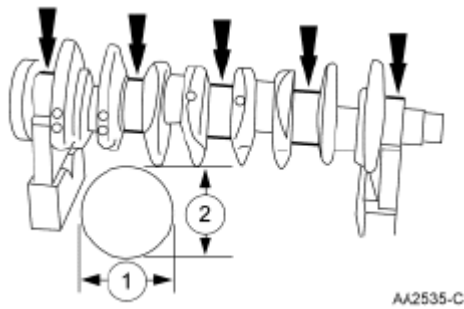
Measuring Crankshaft Main Bearing Journal Diameters
